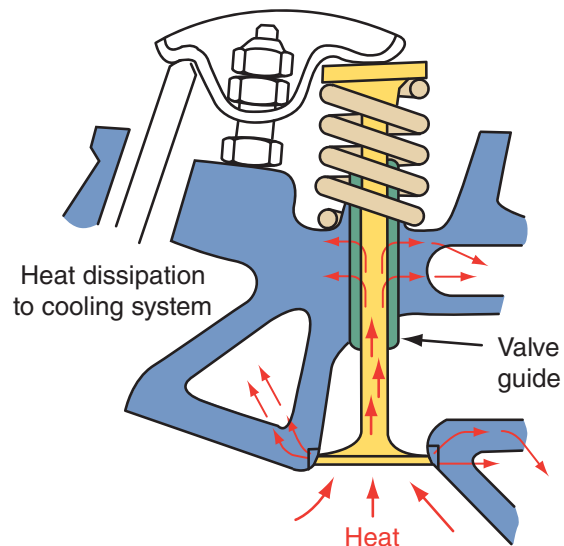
Valves cool by transferring heat to the liquid passages in the cylinder head.
